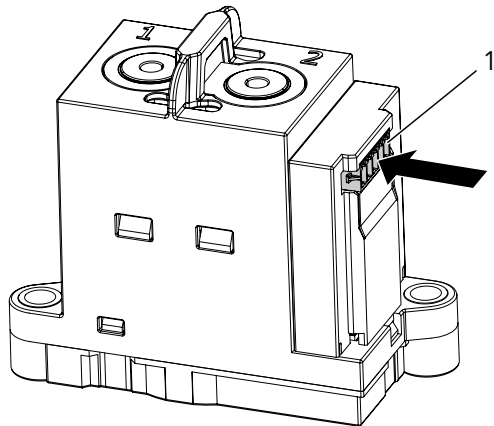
C303-XXX-G0P-...: Example with Phoenix connector:
